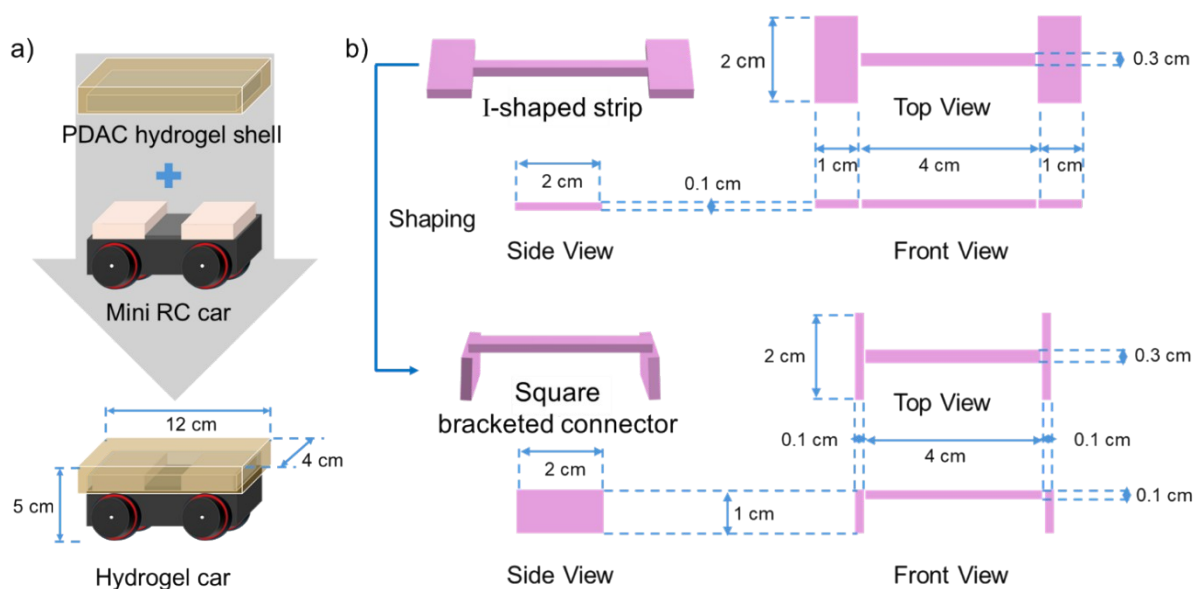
(a) The assembly process and dimension of the hydrogel car; (b) The dimension drawing of the I-shaped strip and square bracketed connector.
